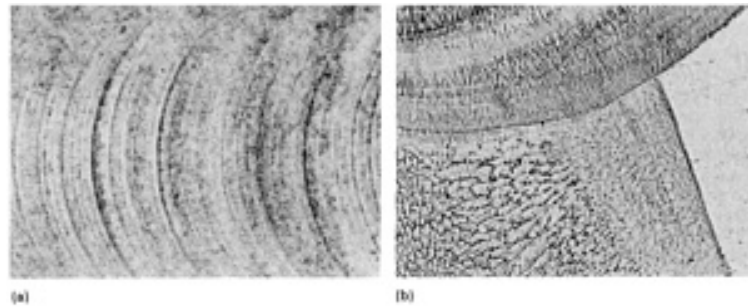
SOLUTE BANDING AND SURFACE RIPPLING IN WELD BEADS. (A) SURFACE RIPPLES IN A TUNGSTEN-INERT GAS WELD MADE WITH AL-5SI FILLER. 6×. (B) SULFUR AND PHOSPHORUS SOLUTE BANDING AT THE FUSION BOUNDARY OF A MANUAL ARC WELD IN CARBON-MANGANESE STEEL. 26×. COURTESY OF THE WELDING INSTITUTE
